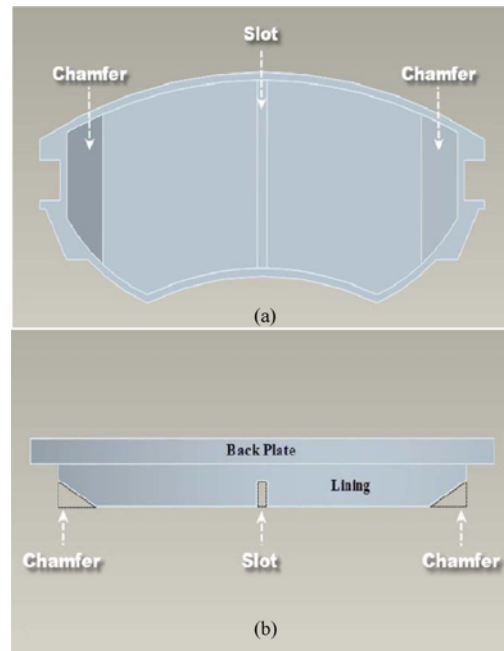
Typical brake pad with chamfers and a slot: (a) Front view; (b) Side view, and chamfers and a slot with removed material portions.
